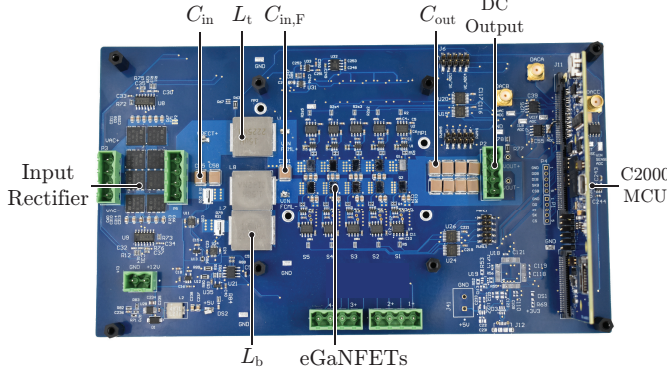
Photograph of the hardware prototype. A component list of the power stage is provided in Table I. Dimensions: 222 mm \times 127.5 mm.
